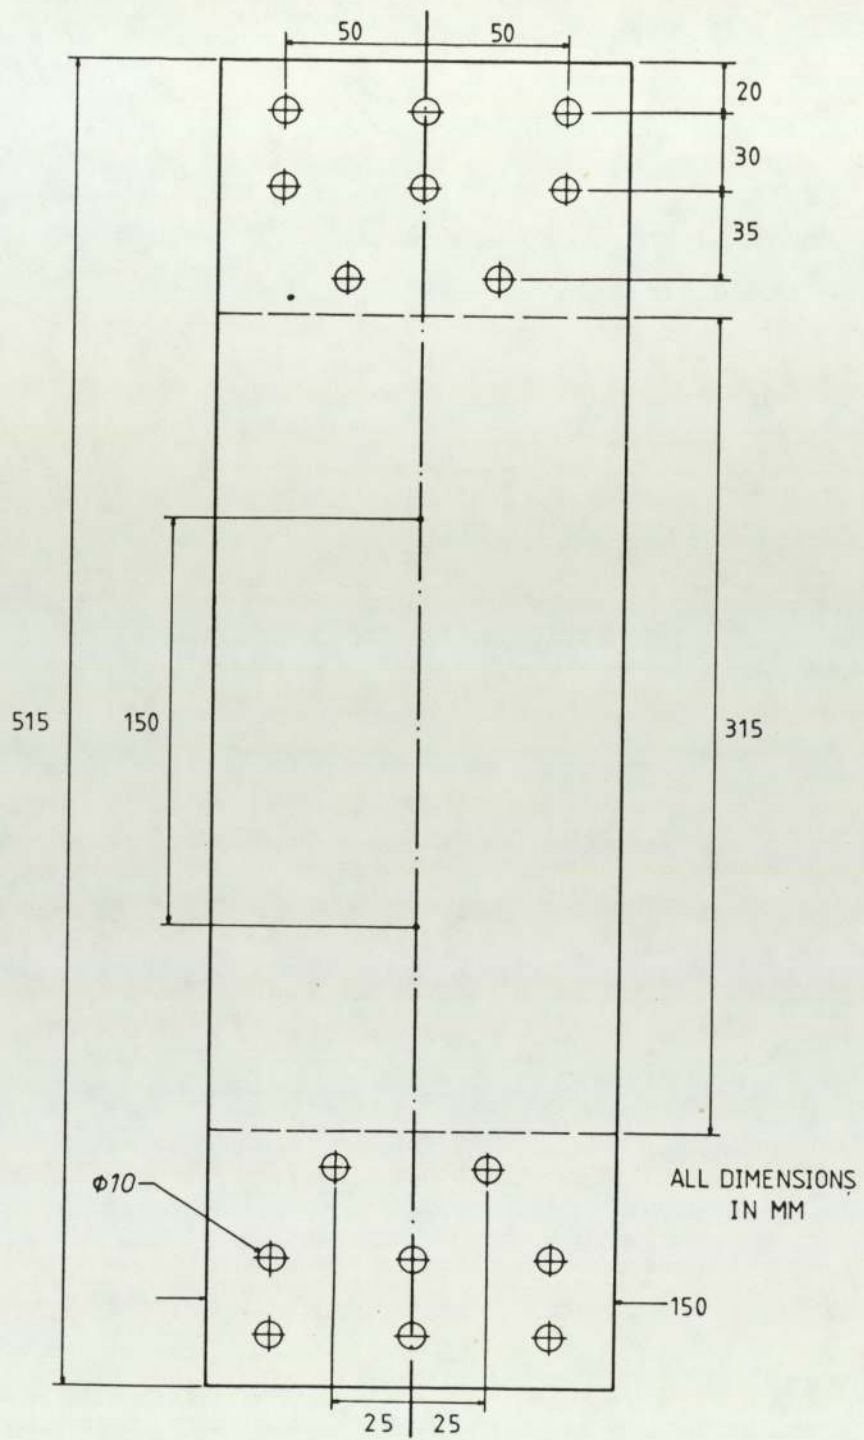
Oversized Tensile Blank used for Uniaxial Prestraining. Clamping is Achieved by Bolt- ing the Grips onto the Blank.
